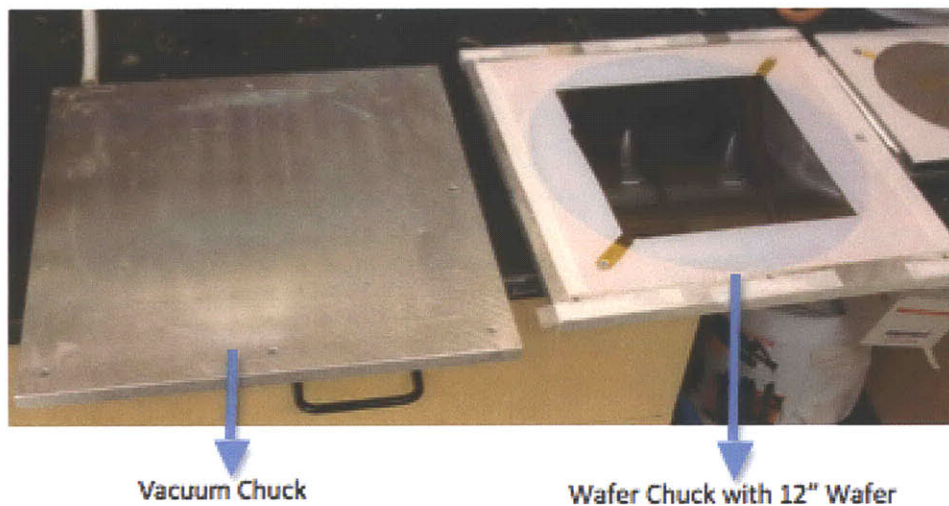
Main Parts of Aluminum Casting Machine for Large Area Stamp, Developed by Nano-Terra LLC.
